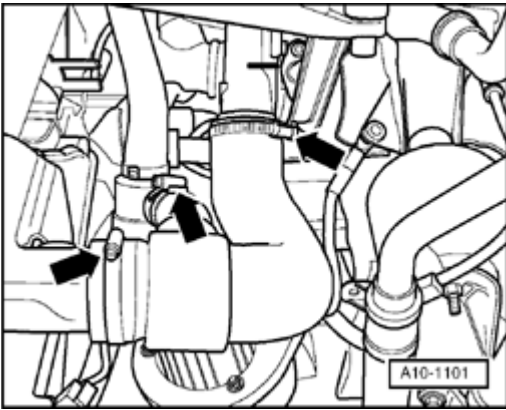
Removing Lower Air Hose Between Turbocharger And Lock Carrier
